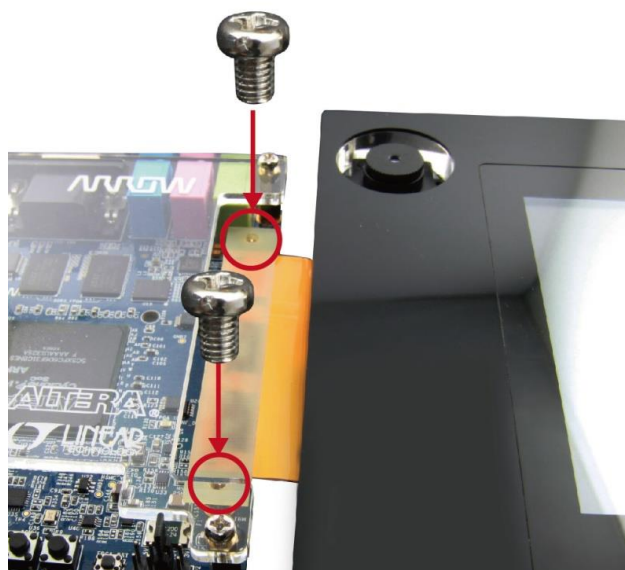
Install copper pillars and nuts on the mounting hole
